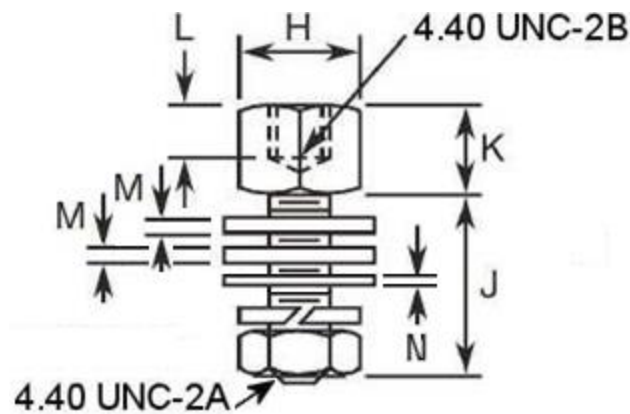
(J) – FEMALE SCREW LOCK ASSEMBLY (all dimensions in millimetres)
